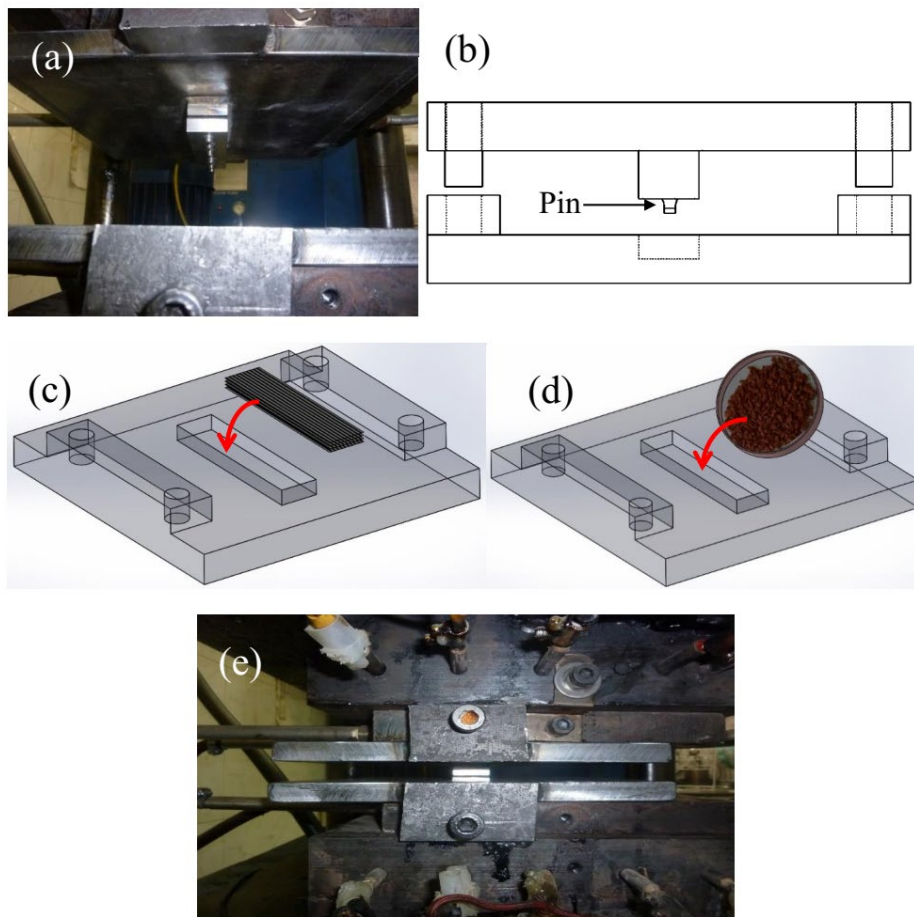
Specimens preparation by thermoforming and insertion way of PPSCGF granules and prepreg sheets of PPLGF in mold, (a) preheat the mold, (b) schematic drawing of molding, (c) insertion of prepreg sheets, (d) insertion of granules, (e) applied pressure and cooled mold.
